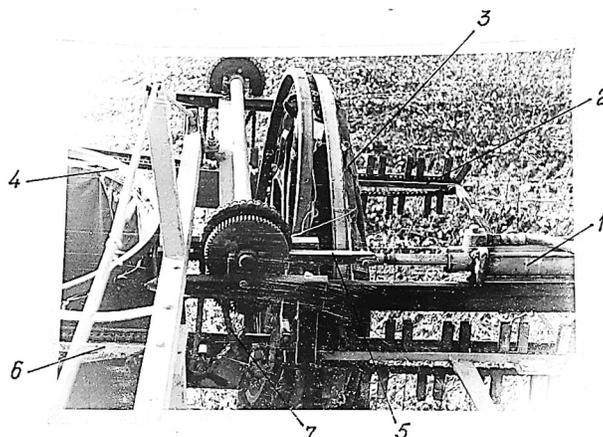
Mechanism for changing containers on a cotton picker. 1 - hydraulic cylinder; 2 – store of empty containers; 3 - container in the store; 4 – container ring; 5 - gear rack; 6 - guides; 7 - drive chains
